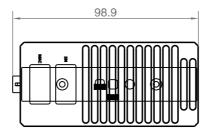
FS820-E1 Mechanical dimensions (unit: mm)
